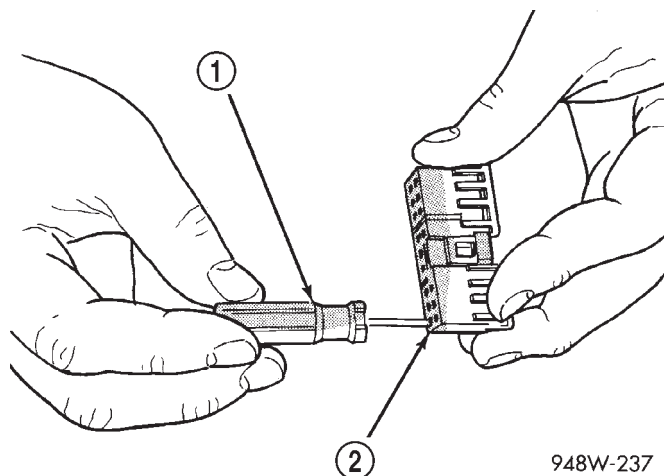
TERMINAL REMOVAL USING SPECIAL TOOL
